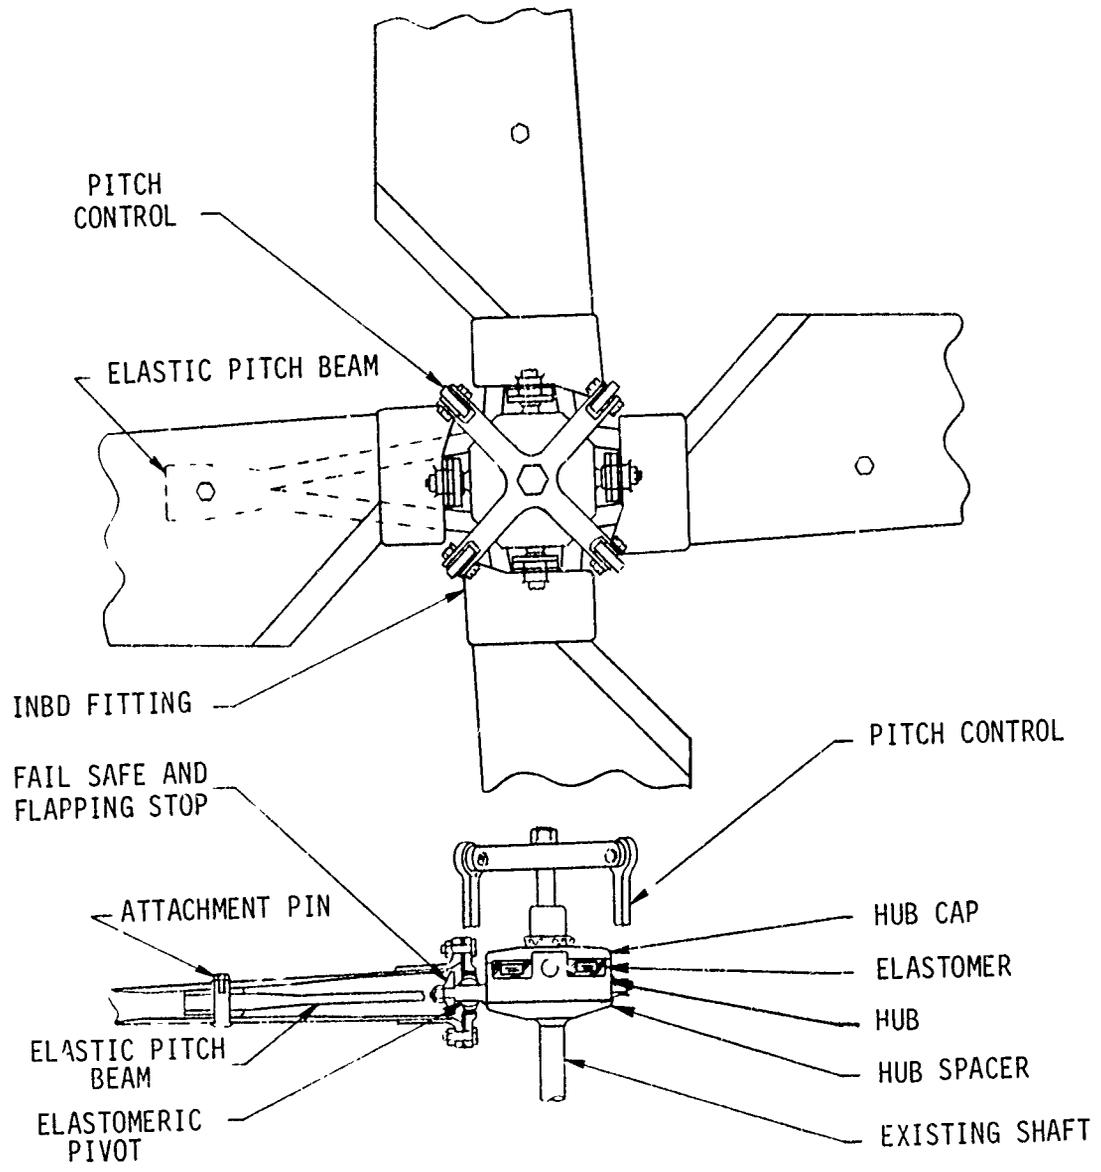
LOH Rotor Hub, Tail Rotor, 4-Bladed Elastomeric.
